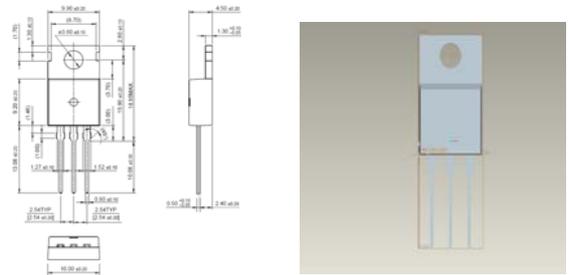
7805 Regulator dimension and CAD data(Pro-E)
